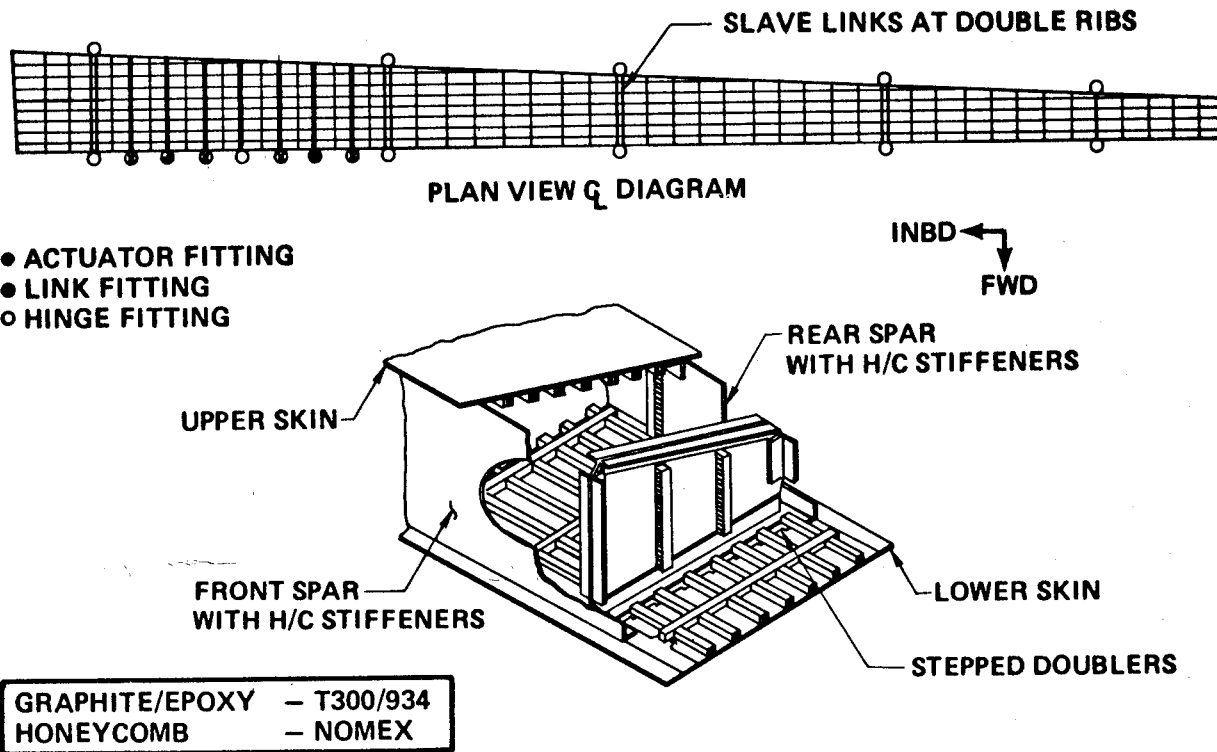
YC-14 Elevator Gr/Ep Waffle Skin Design 0° – 90° Strap H/C Stiffeners
